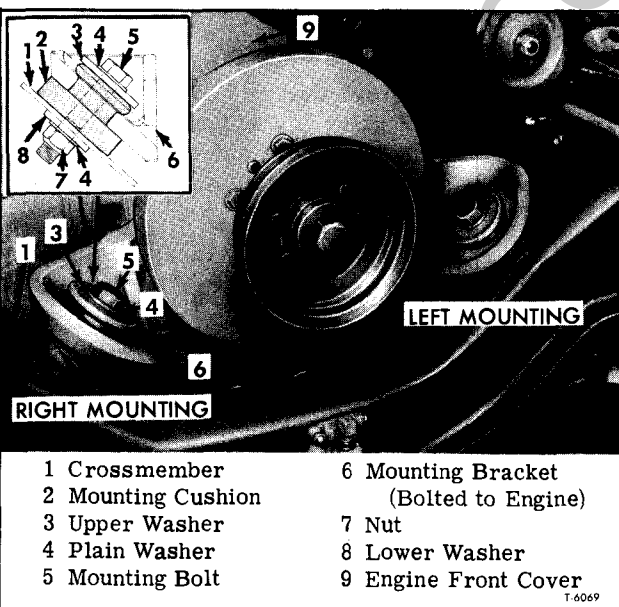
Engine Front Mounting on DI, FI90 (Vehicles with Air Conditioning)
